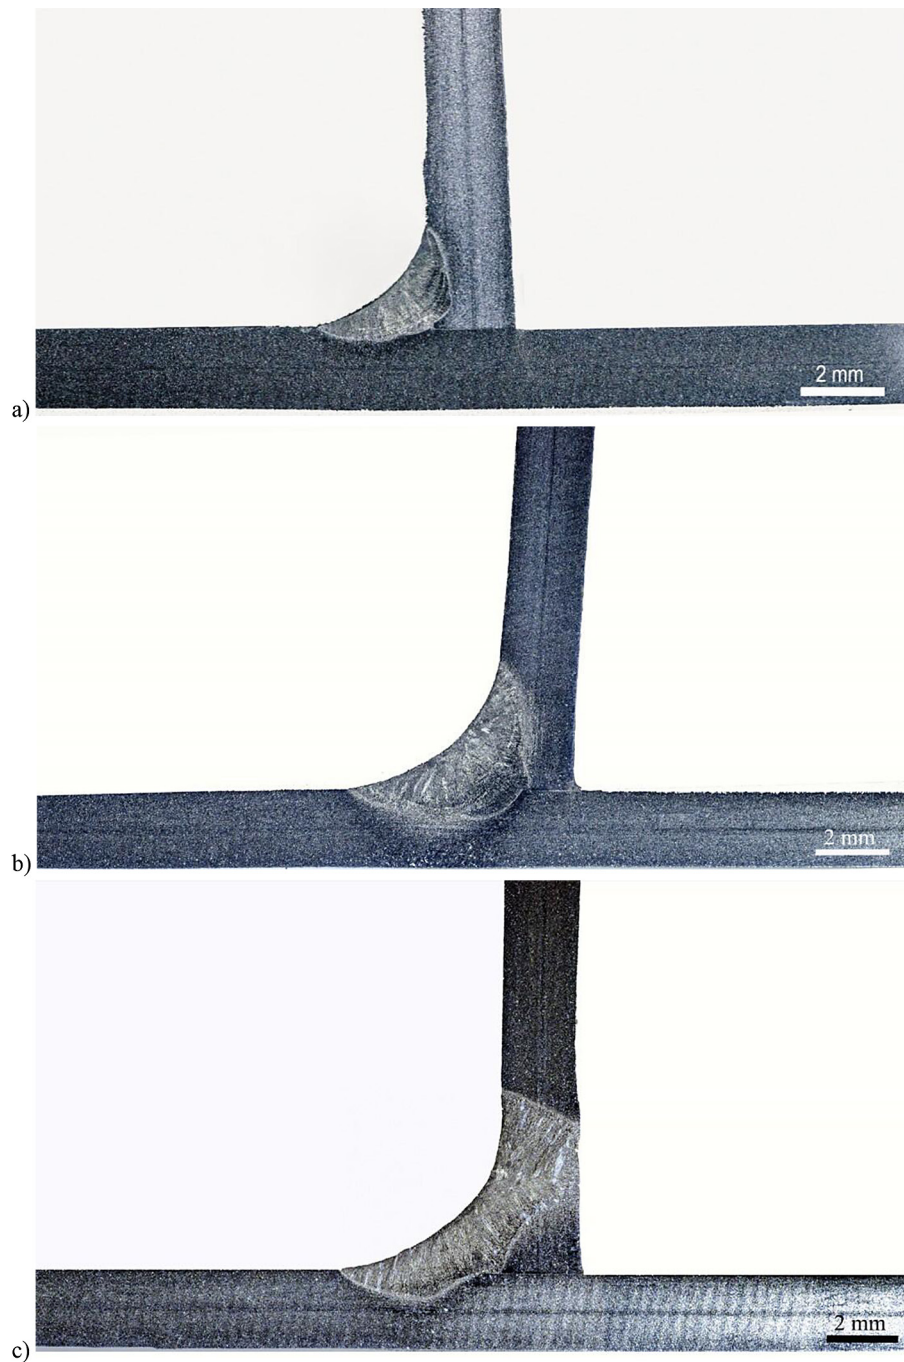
Cross-sections of welded joints: a) S1, b) S2, c) S3
